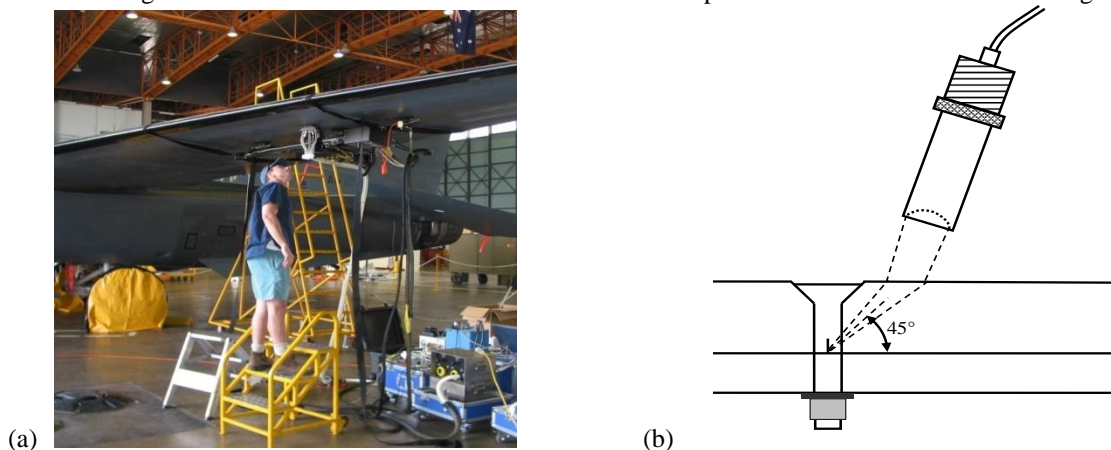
(a) automated ultrasonic inspection of Taper-Lok fastener holes in an F-111C wing using the Intraspect system, and (b) schematic of 45° angle-beam shear-wave inspection using focussed immersion transducers
